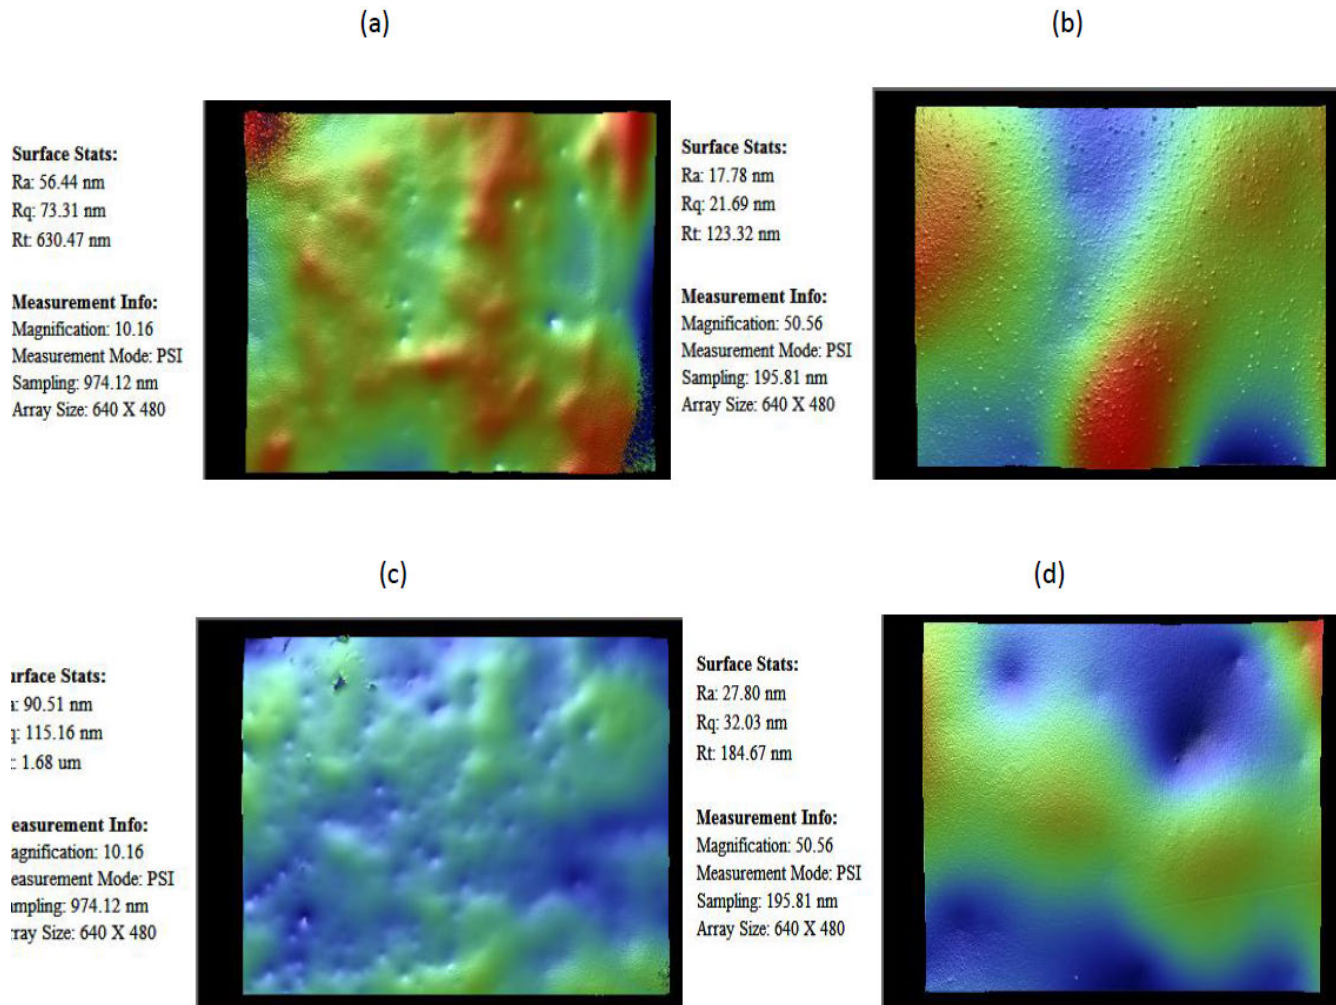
Photographs of (a,b) glass moulded prism surface 1 and (c,d) glass moulded prism surface 2 by WYKO NT9300.
